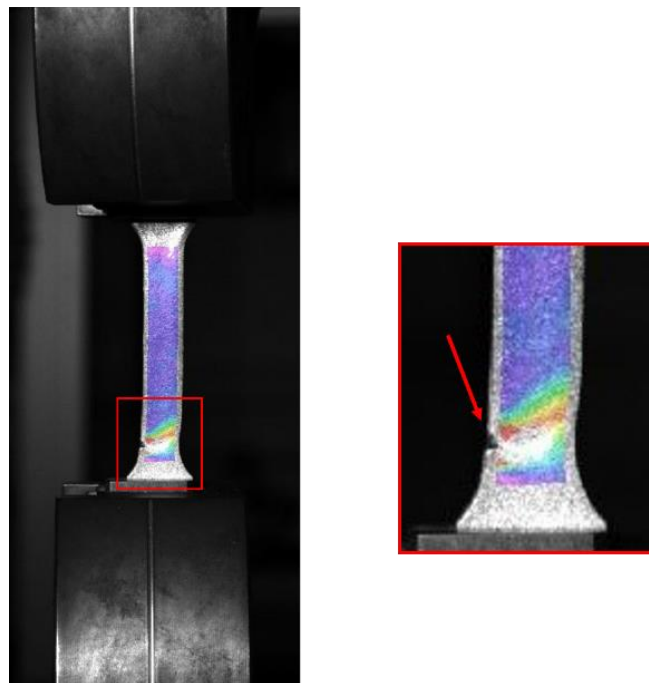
Representation of a surface pore defect that induced premature fracture on sample 4Hb.
